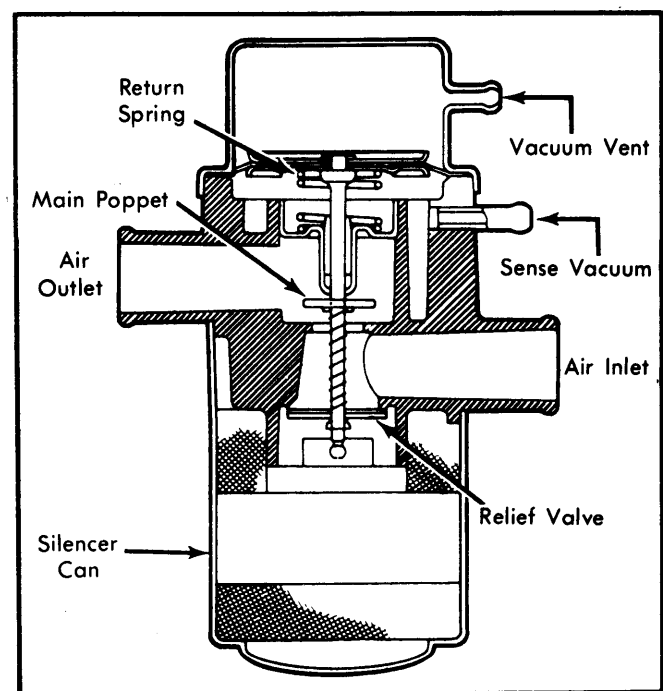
Cutaway View of Air Bypass Valve (Normally Open Type)
